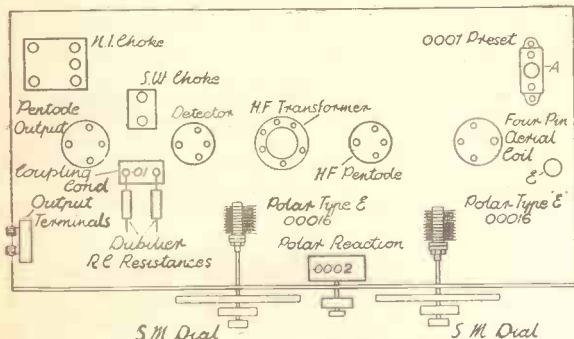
How the layout is arranged. Note the row of valve holders and coil holders.
